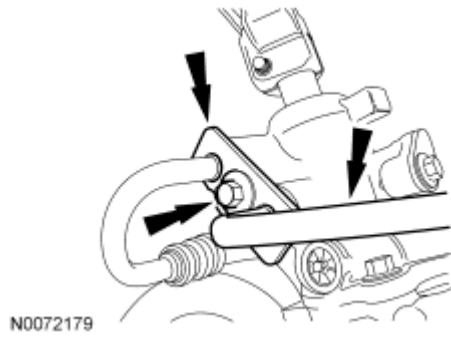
Identifying Bolt, Clamp Plate And PSP Tube
